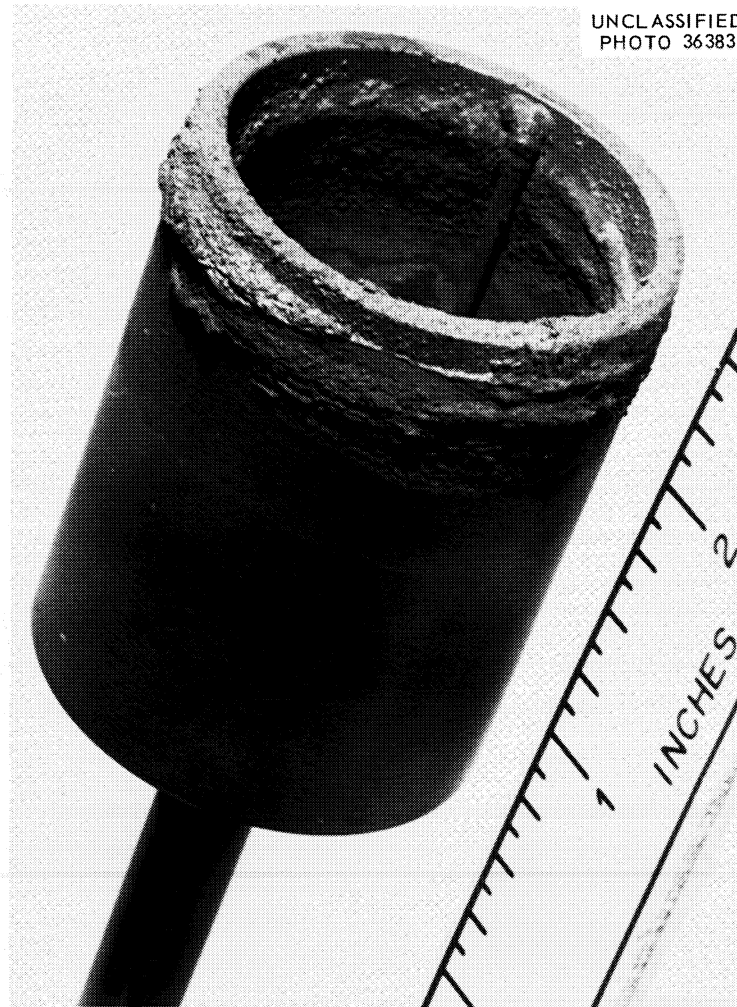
INOR-8 Solder Freeze-Valve Cap After Testing.
